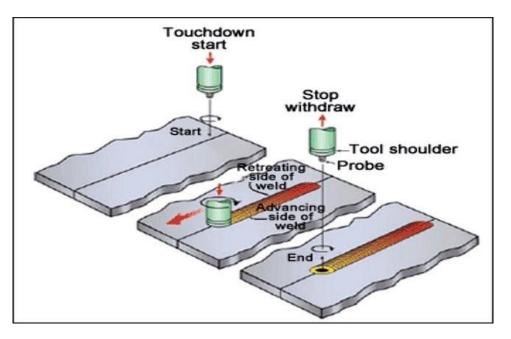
Schematic Illustration of Friction Stir Welding Process in action.
